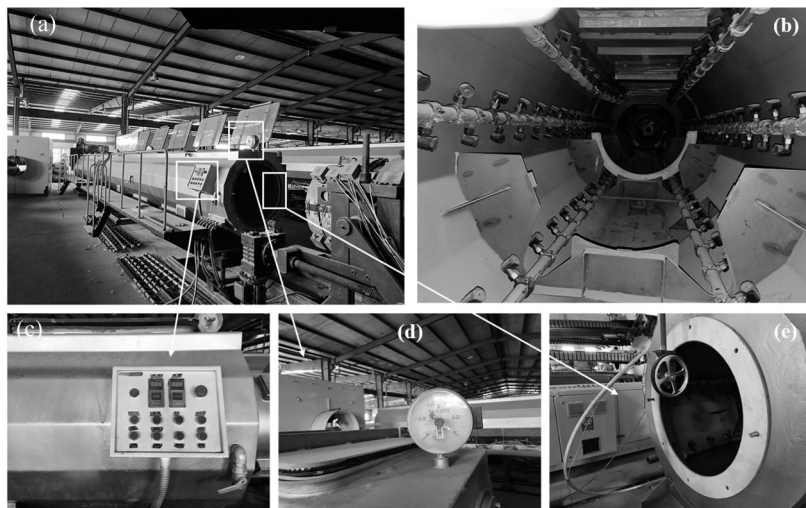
Cooling shaping equipment: (a) outside of cooling and shaping equipment; (b) inside the cooling and shaping equipment; (c) control panel; (d) pressure monitoring; (e) sleeve
